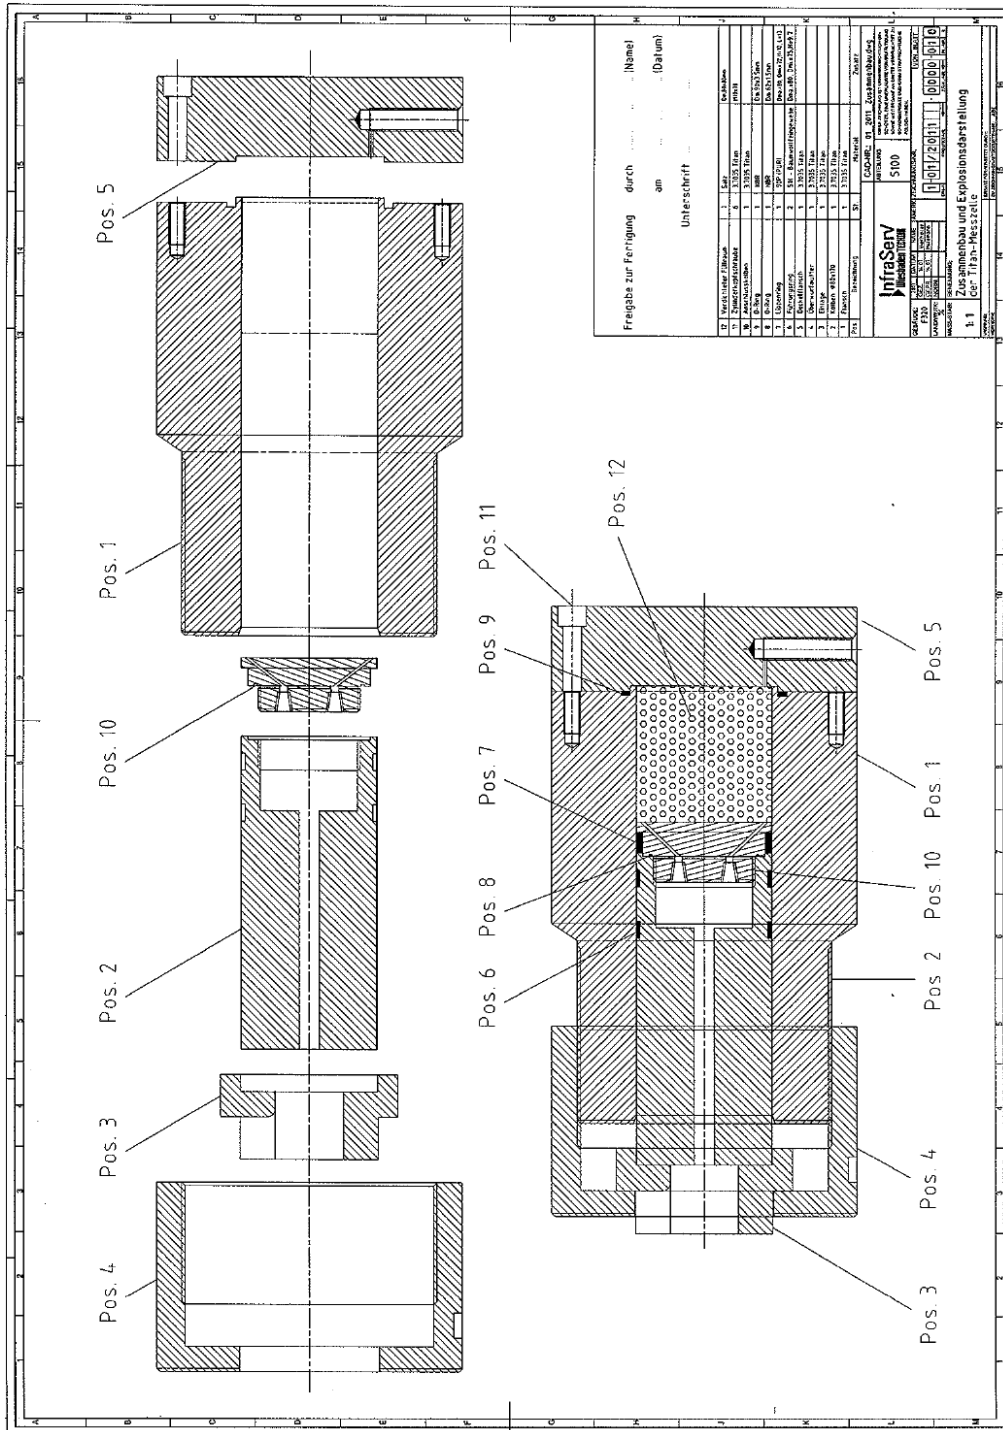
Construction design of the diffusion cells: General assembly drawing and exploded view /INF 11/
